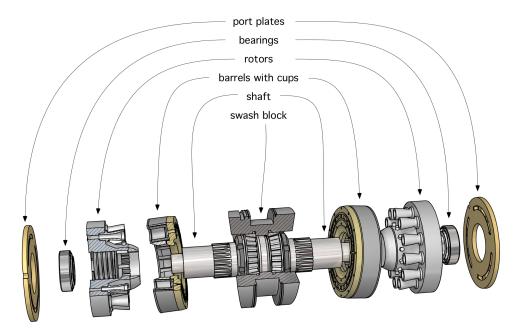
Exploded view of the main parts of the transformer, excluding the housing However, also this design has a number of disadvantages:
